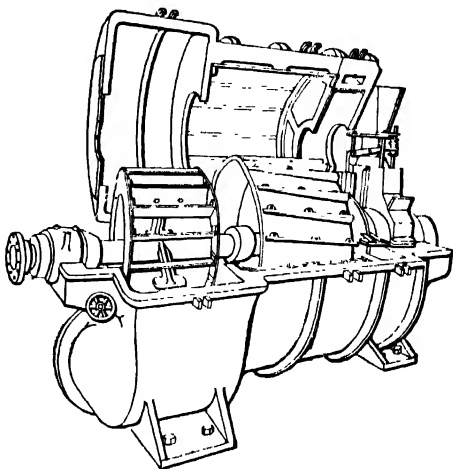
Seymour Coal Pulverizer — Unit Type.
